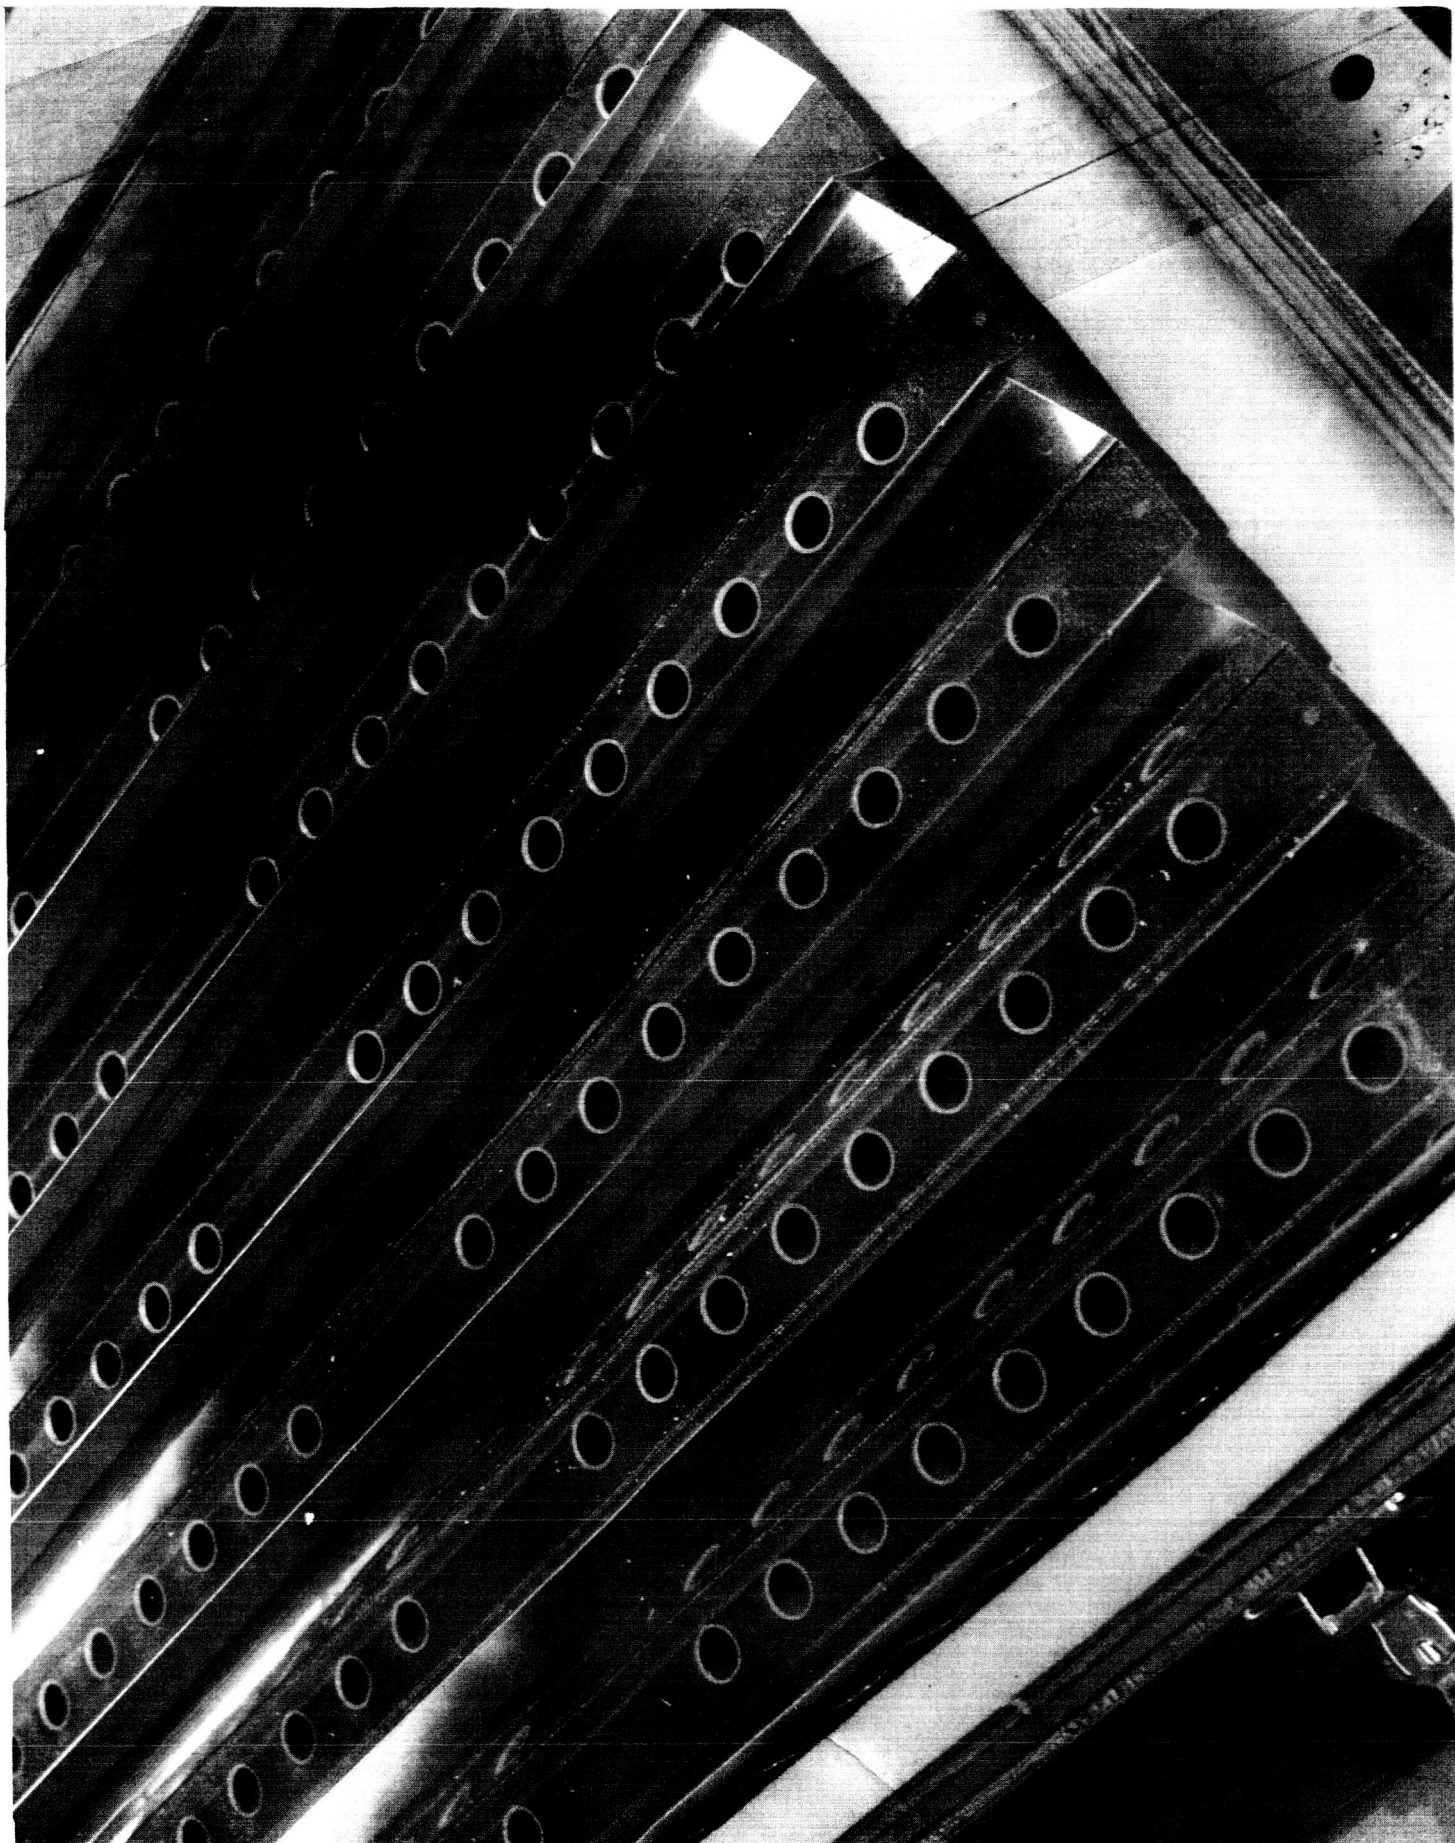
FRONT SIDE OF PANEL AFTER INSTALLATION
